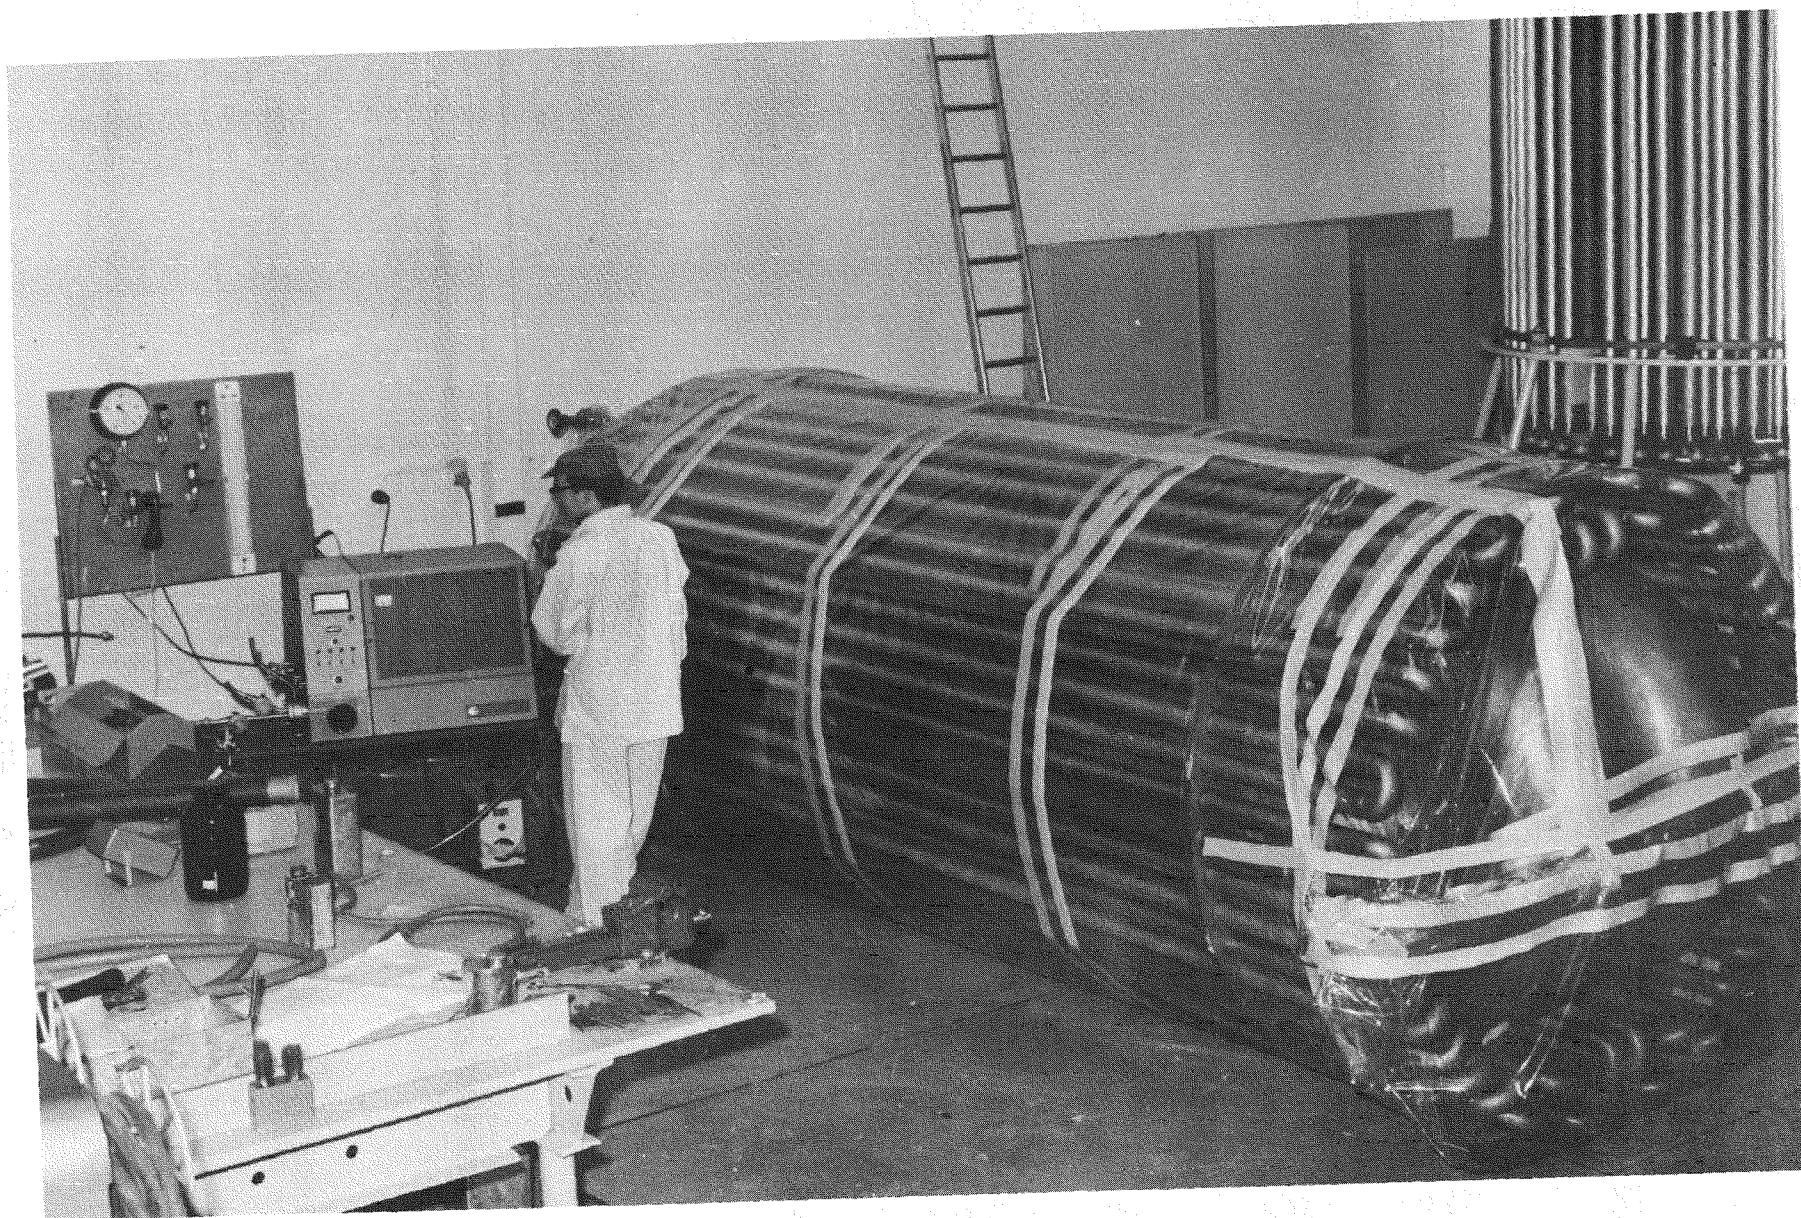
HELIUM LEAK DETECTION OF TUBE BUNDLE AFTER FILLING
